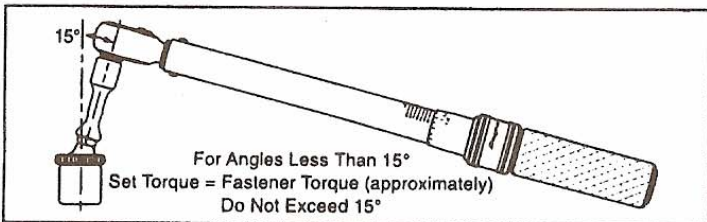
Fastener torque is greater than torque wrench square drive torque.
